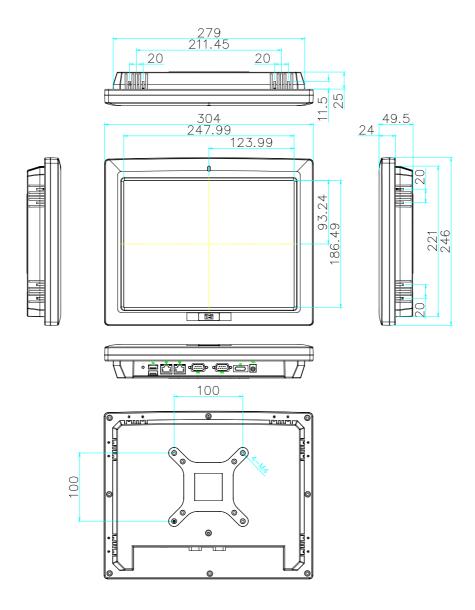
E2D400 Top and Bottom Panel Dimensions (mm)
